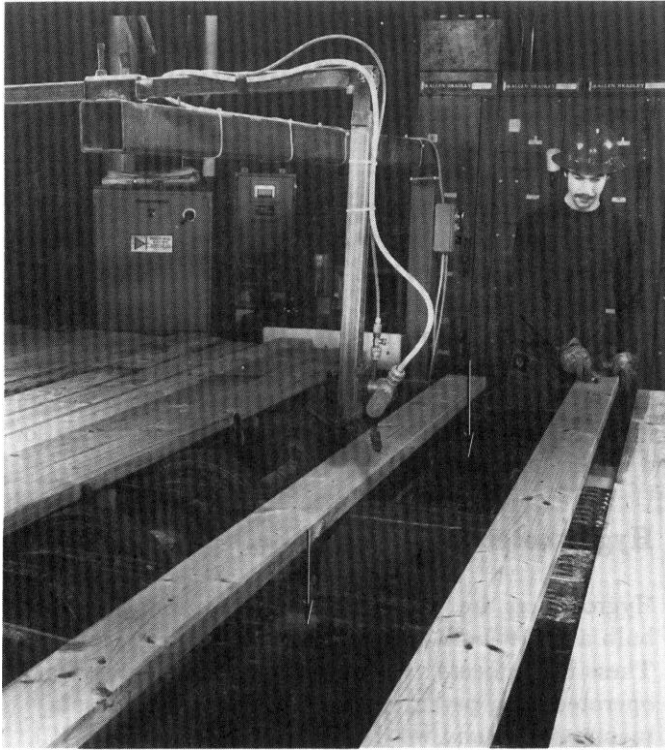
Stationary inline moisture meter located on dry chain. Arrows show location of noncontact sensors. Note spray nozzle for marking pieces beyond preset limits. (MC88 9035)
